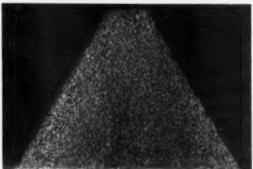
Rolled-Thread Cap Screw Decarburized for Easier Fabrication and Subsequently Recarburized and Hardened
